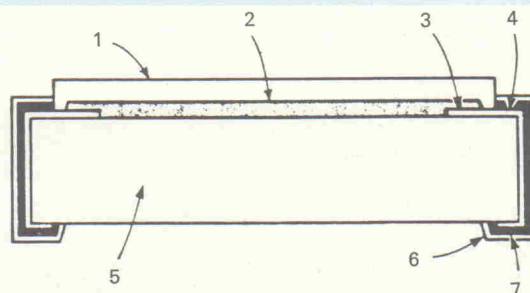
Leadless chip resistor as used for surface mounting für Oberflächenbefestigung benutzter, anschlussloser Chip-Widerstand
